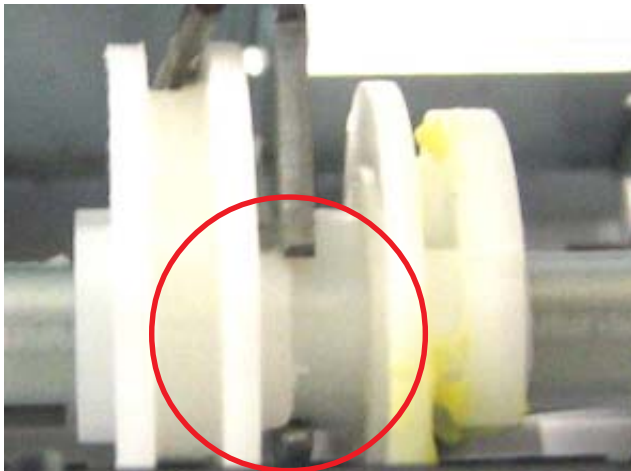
LIFT CAM SHAFT ASSEMBLY
